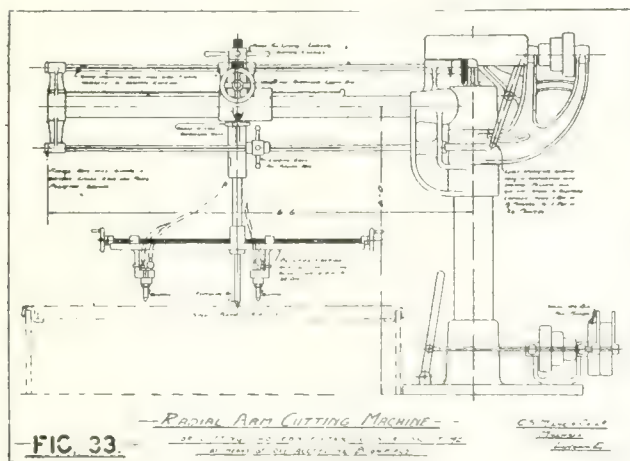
is practically a radial drilling machine with the cutting blowpipe as a drill. By the combination of the three cones belt drive, and the special drive in the head, infinite variety of speed,
